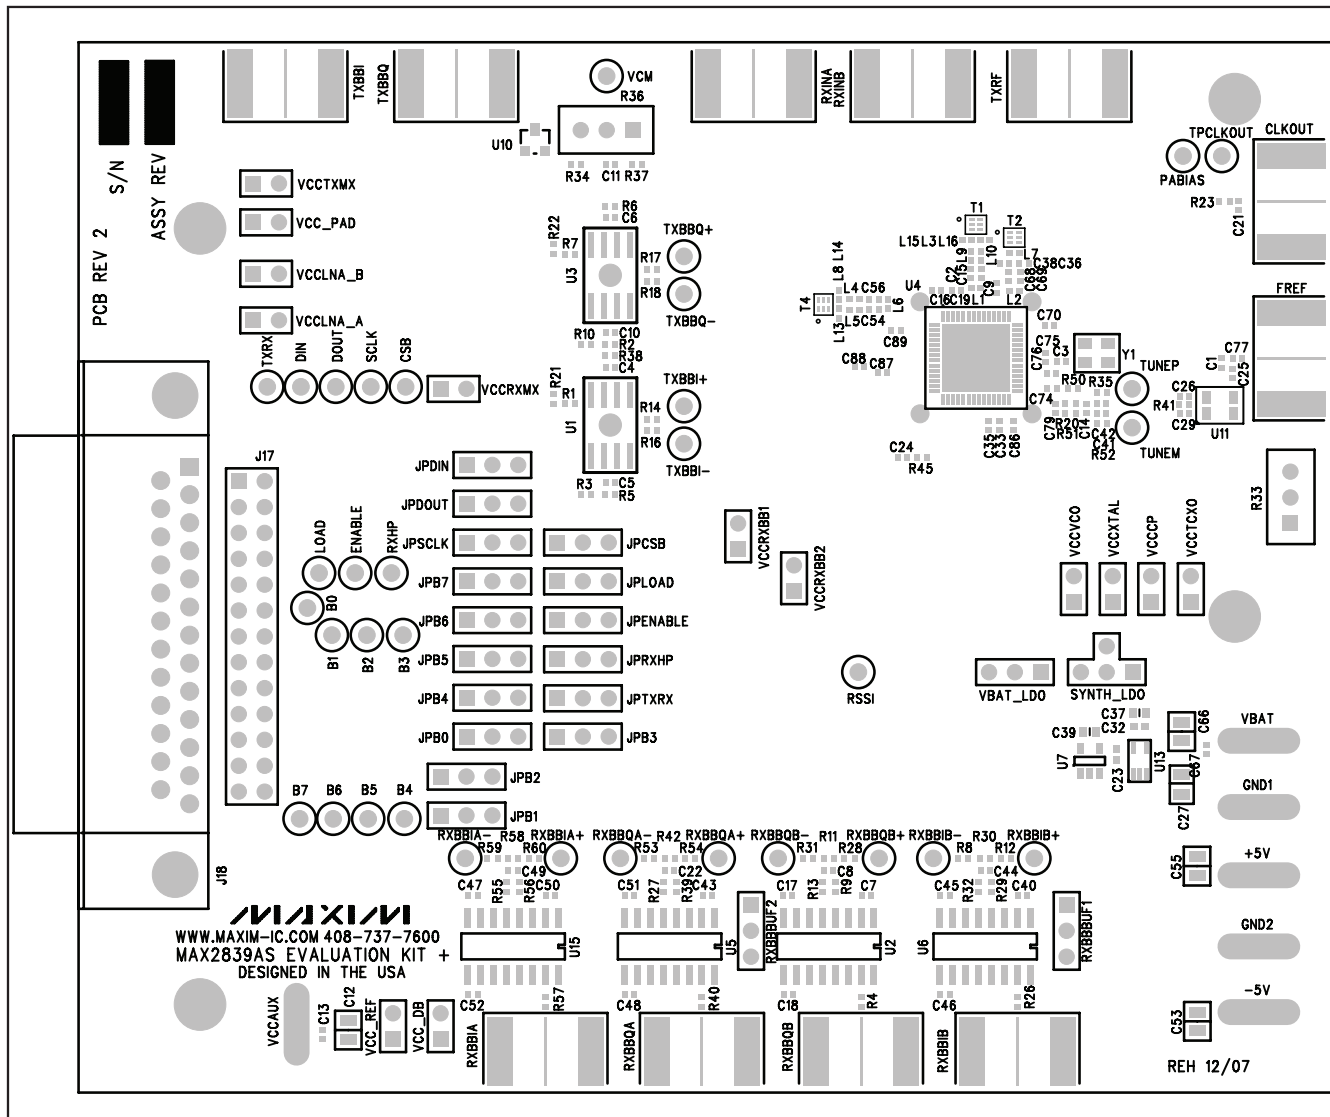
MAX2839AS EV Kit PCB Layout—Top Silkscreen
